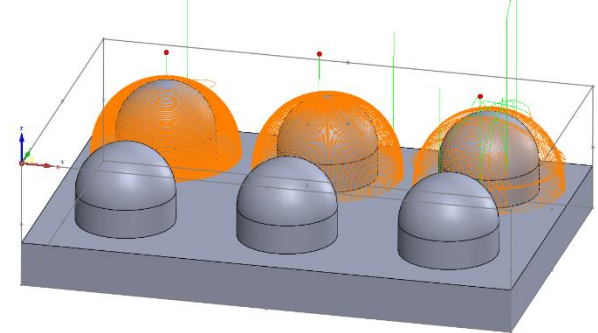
Toolpaths for 5-axis milling. From the left : Constant-Z, Radial and Linear
